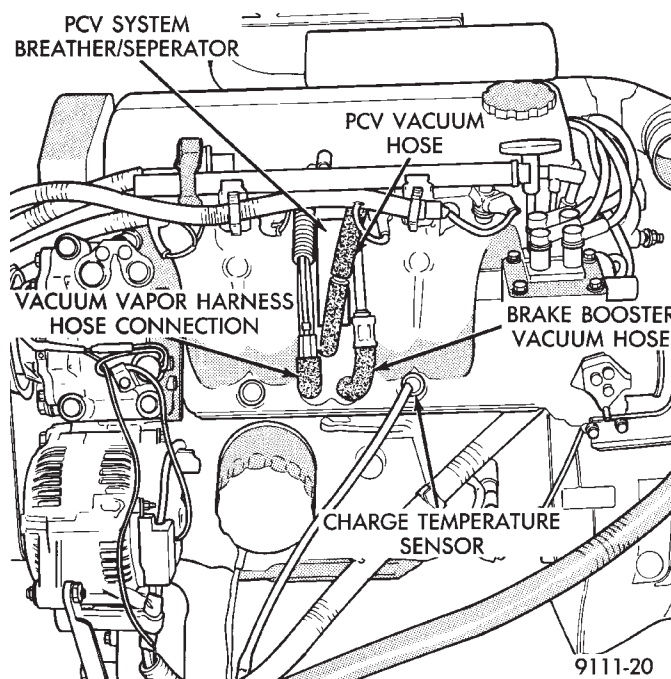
Intake Manifold Electrical and Vacuum Hose Connections
